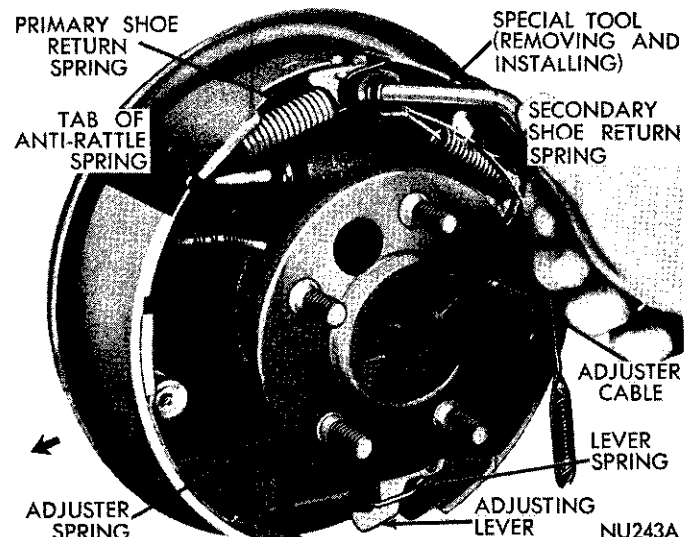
Removing or Installing Shoe Return Springs (Left Rear)
